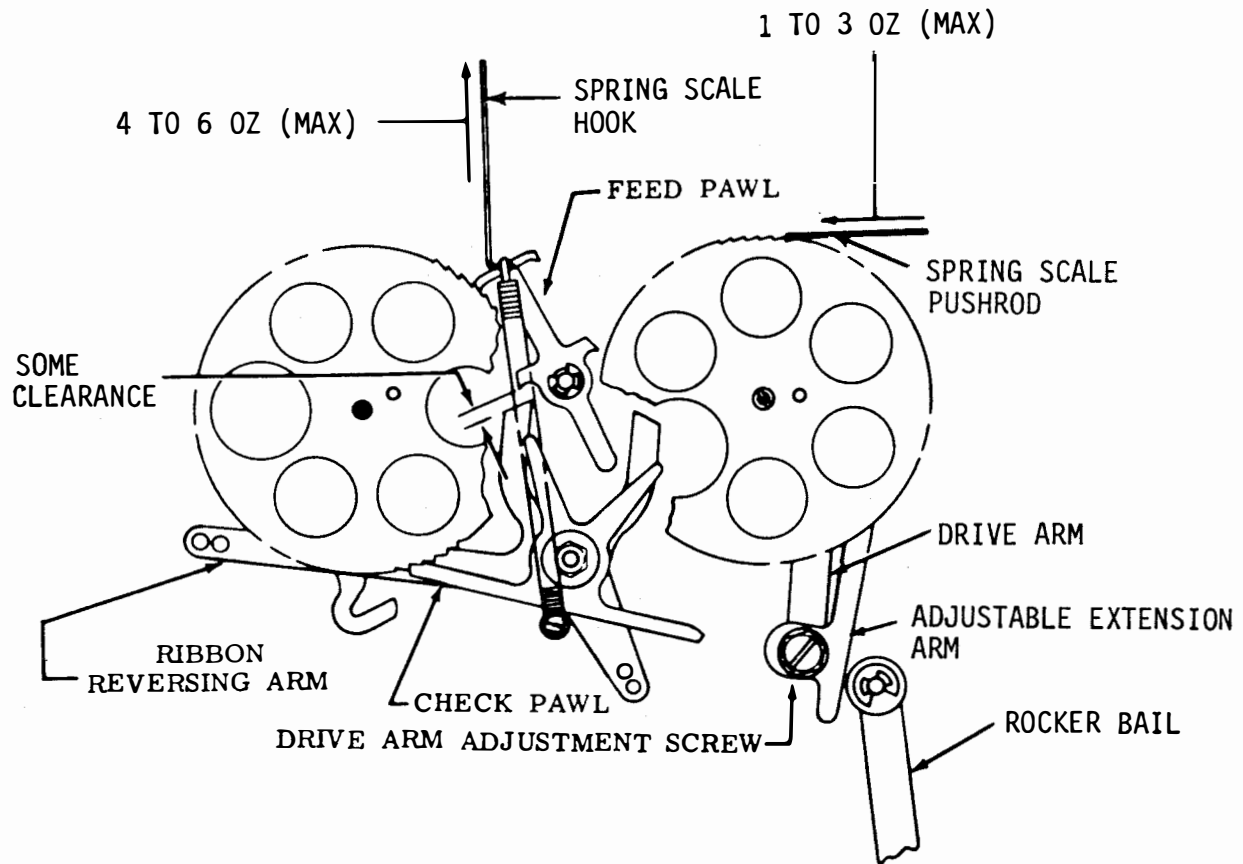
Feed Pawl Spring, Ratchet Wheel Torque Spring and Drive Arm
